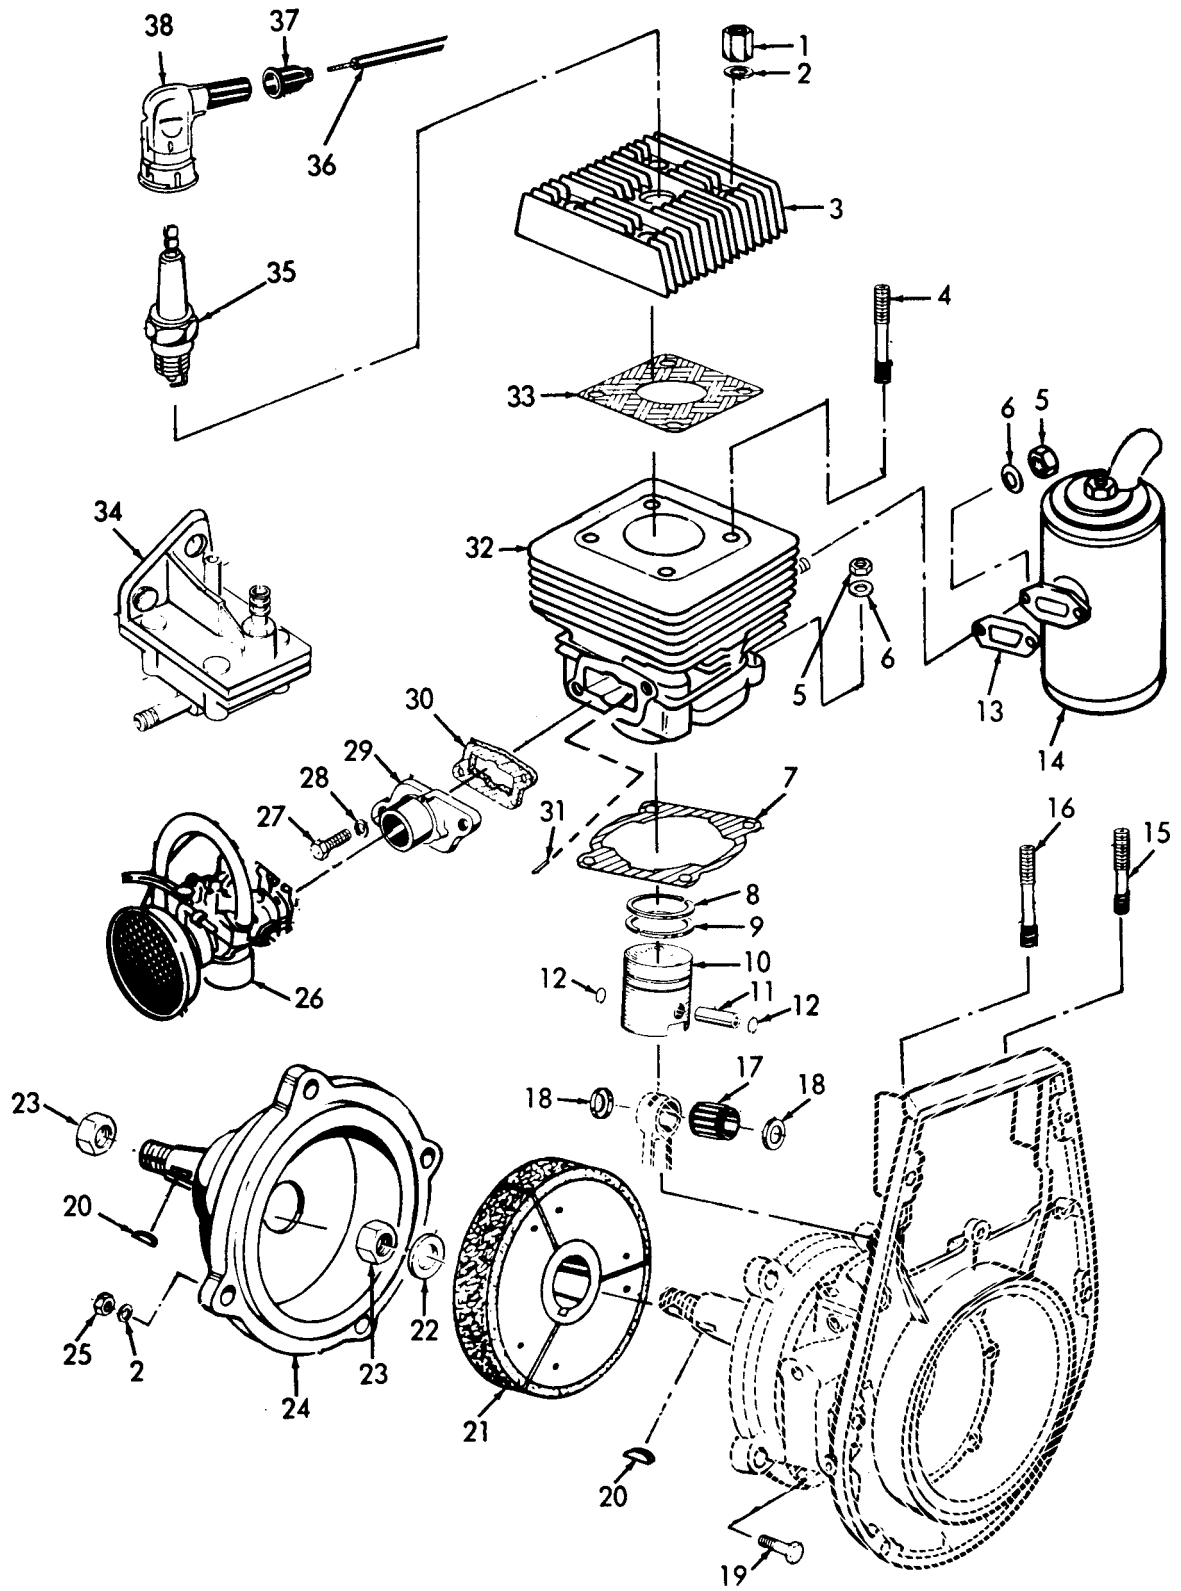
Gasoline Engine Assembly (Sheet 1 of 2).
